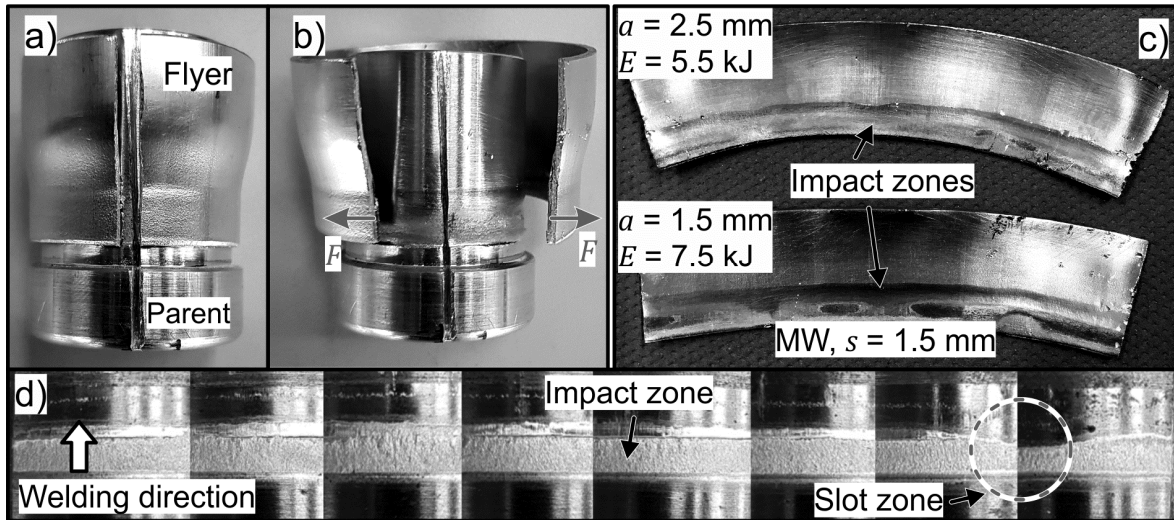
Influence of the initial standoff a on the appearance of the impact zone: a) axially cut specimen, b) bending of flyer, c) inner surface of flyer tubes after MPW experiments at conditions below the welding limit, d) composed view of the outer surface of a parent part after MPW and shear testing
